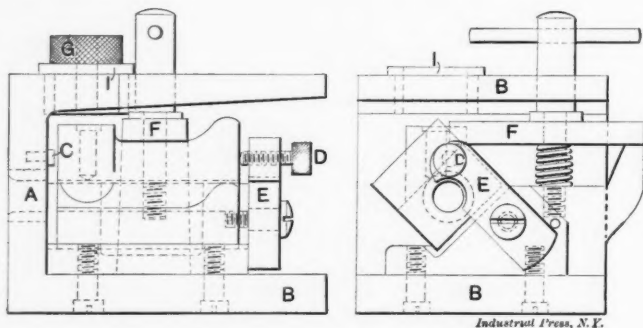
Jig for Holding Piece shown in Fig. 1.
